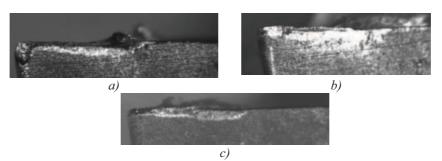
Cutting inserts after cast machining from modified alloy: a) sample 1, b) sample 2, c) sample 3
